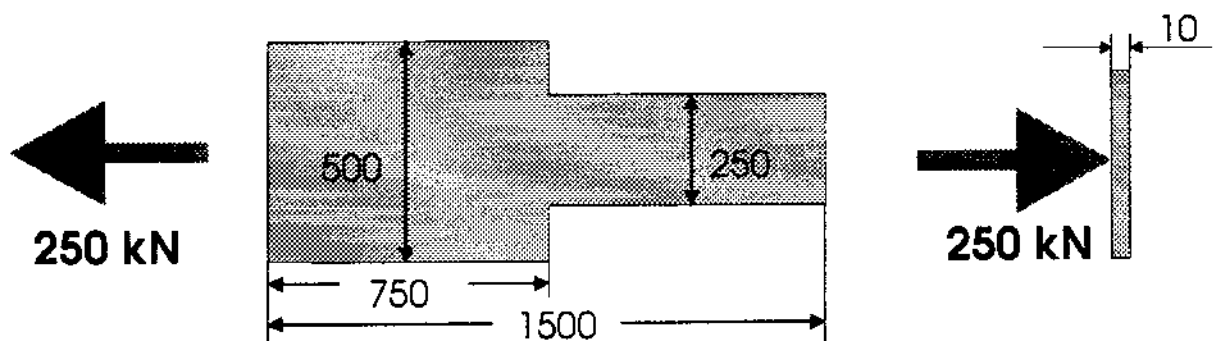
Geometry and Dimensions for Plate *without* Shoulder Fillet
